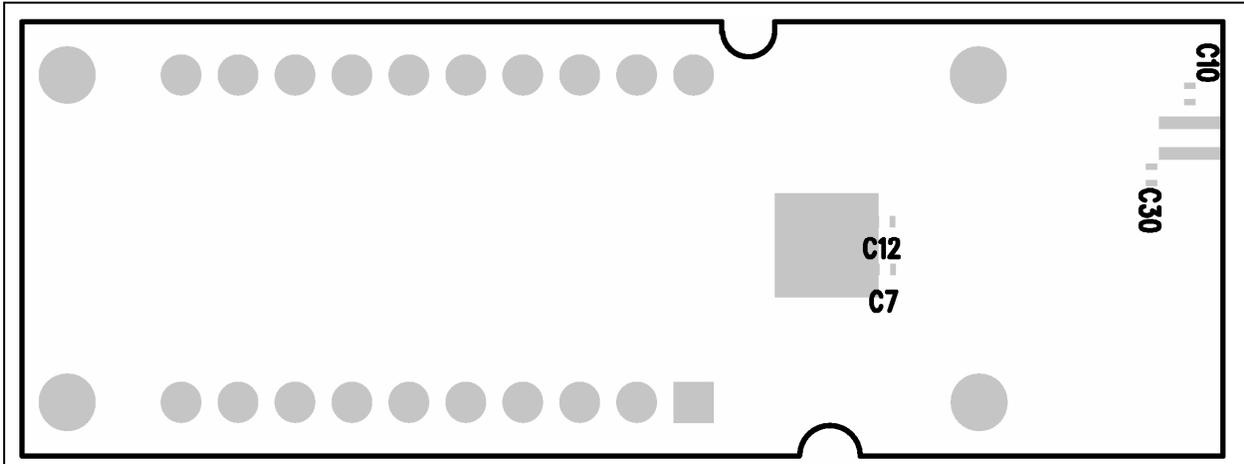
HFRD-2.0A Component Placement Guide – Solder Side
